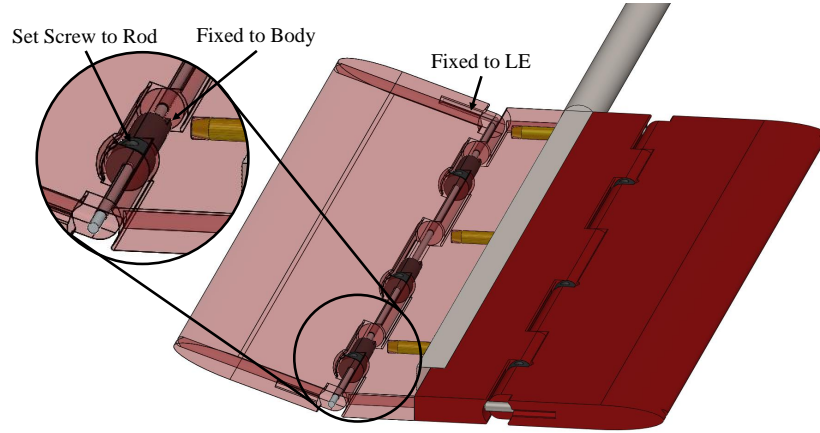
Detailed view of the foil hinge mechanism used to achieve passive edge flexibility.
